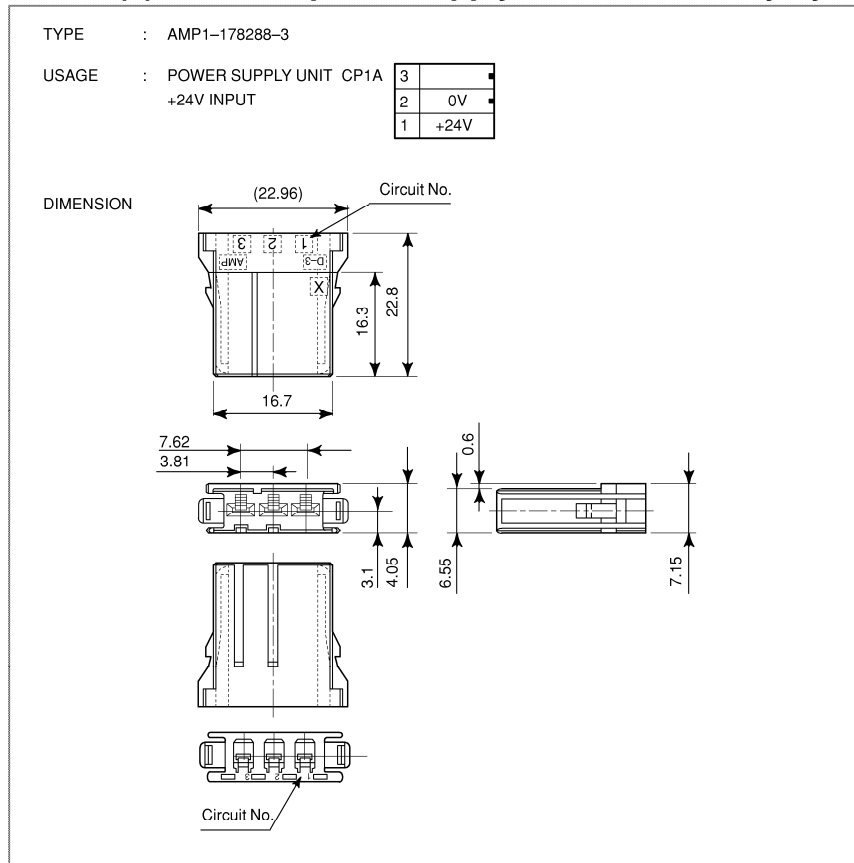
(d) Connector (4) for +24 V power supply manufactured by Tyco Electronics
